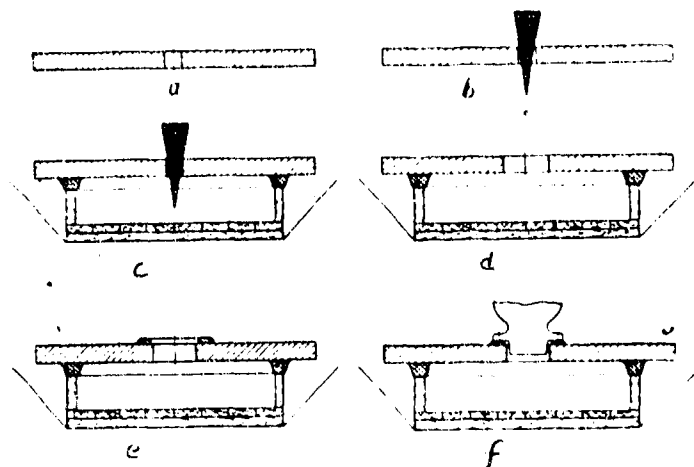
Diagram Showing Steps Involved in Installing a New Kingston Valve in Calm Water: a - hole shot in the sheathing; b - closer (plug) installed; c - box-caisson in place; d - hole has been cut; e - support ring has been welded on; and f) kingston valve's fittings have been mounted.
